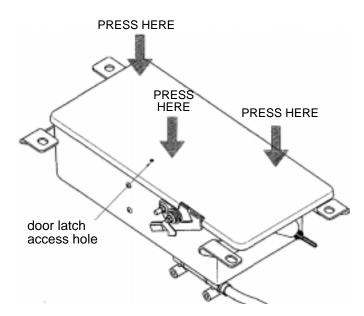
Closing the Door on the FWD Flight Attendant Mask Assembly
